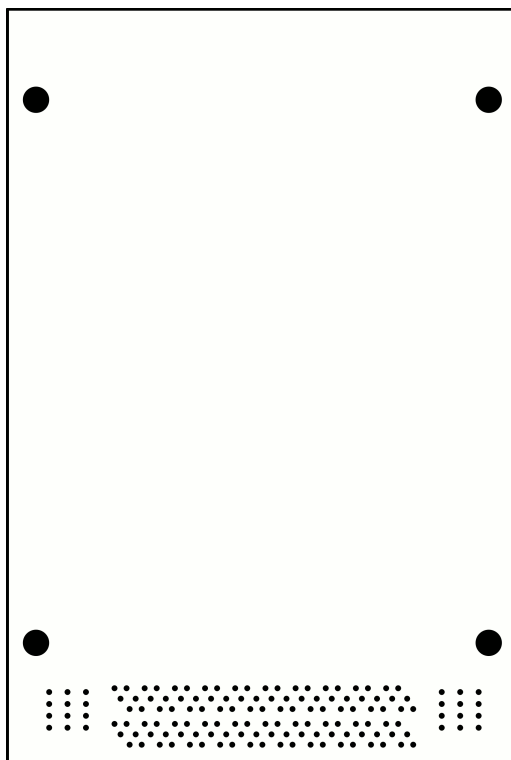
Outline, mounting holes and Z-DOK connector on iADC board [3]
